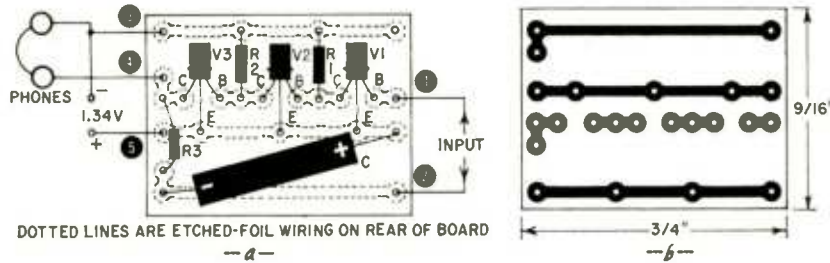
a—Parts layout on the printed circuit board; b—wiring side of board shown approximately twice actual size.
